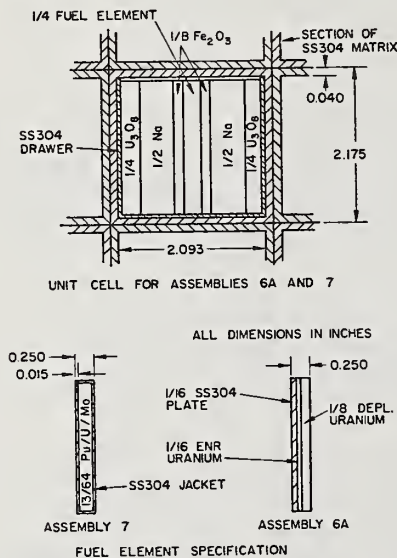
Cross Section of Unit-Cell Showing Matrix and Plate Loaded Drawer, ZPR-6 Assemblies 6A and 7. ANL Neg. No. 116-888.
